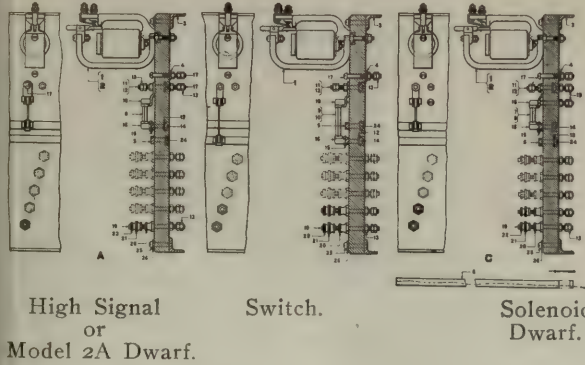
Terminal Board Arrangement Model 2 Electric Interlocking Machine.
